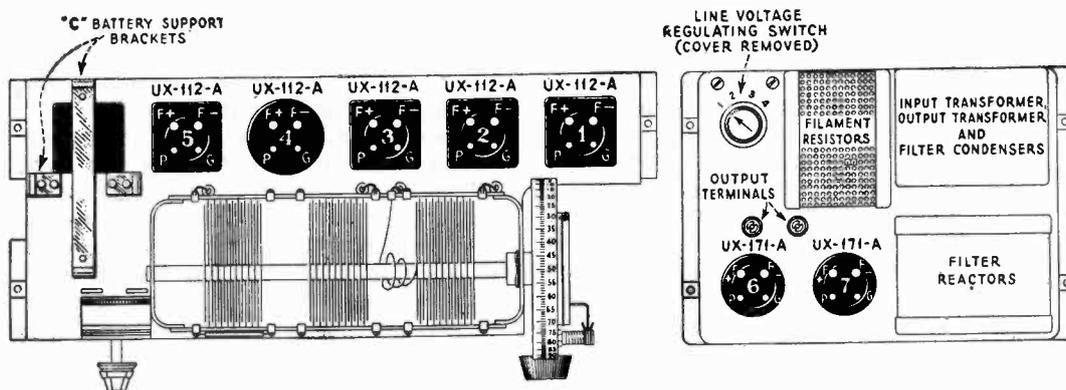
Radiotron socket layout showing filament, plate and grid terminals
